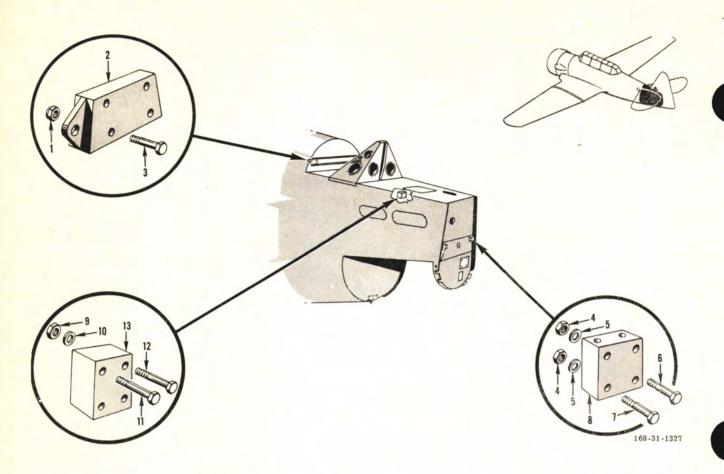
A - UPPER REAR FUSELAGE FRAME AND DECK ASSEMBLIES
